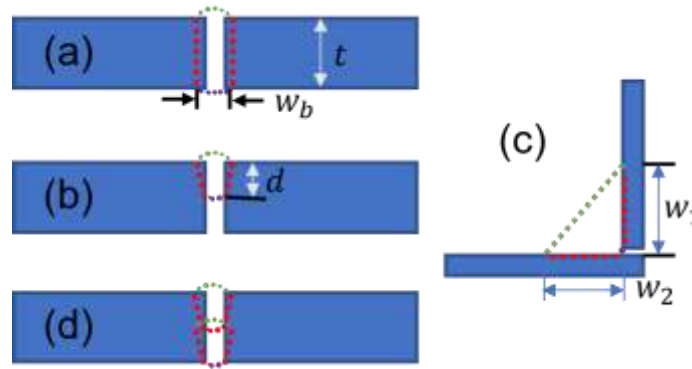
Welds and requirements. (a) Complete penetration of butt weld; (b) incomplete penetration of butt weld; (c) fillet weld; (d) multiple passes.
